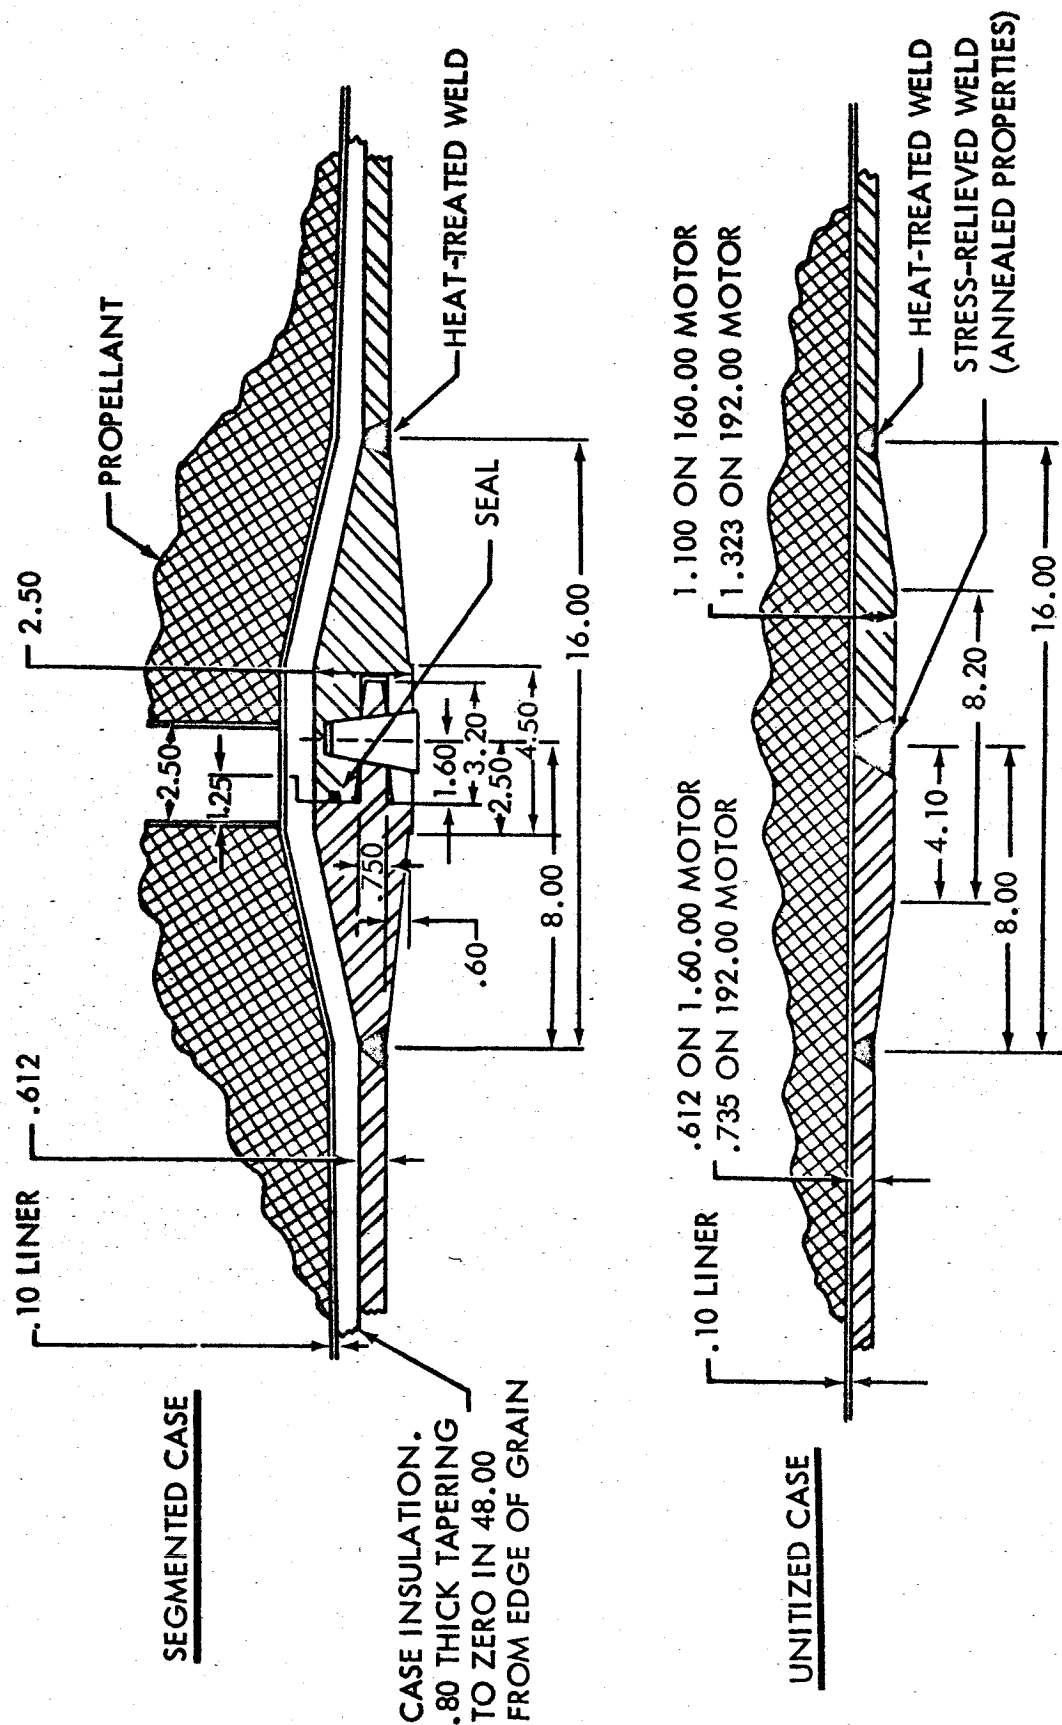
SOLID MOTOR CASE JOINTS
